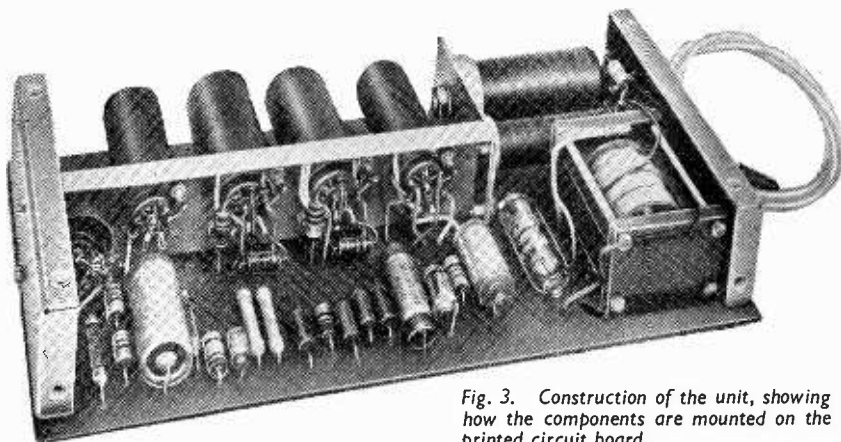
Construction of the unit, showing how the components are mounted on the printed circuit board.
